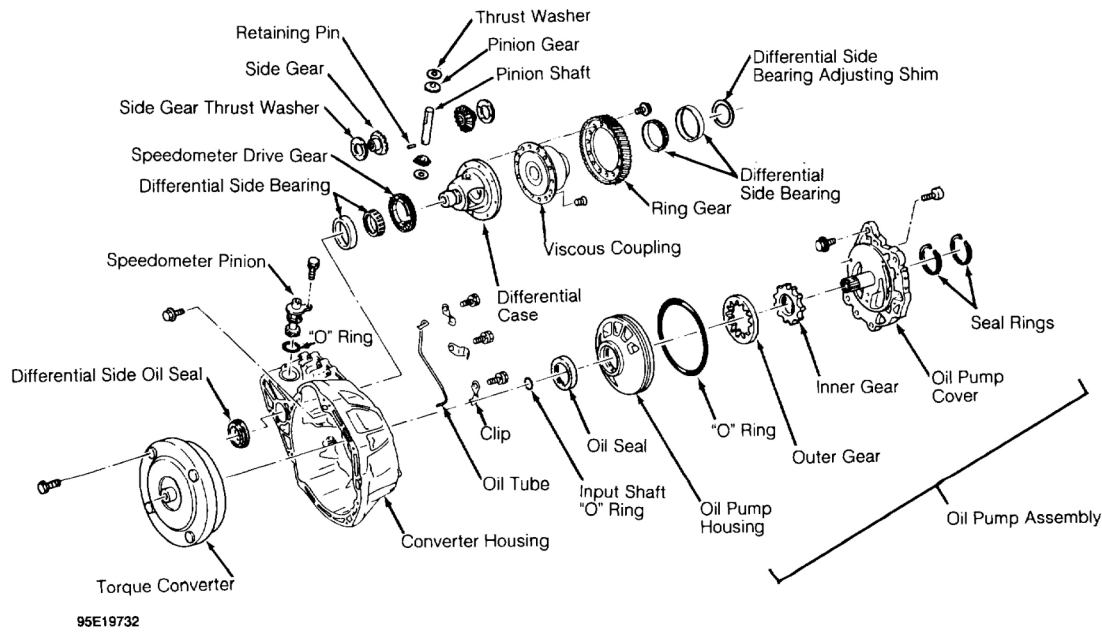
Exploded View Of Torque Converter Housing & Differential Components
